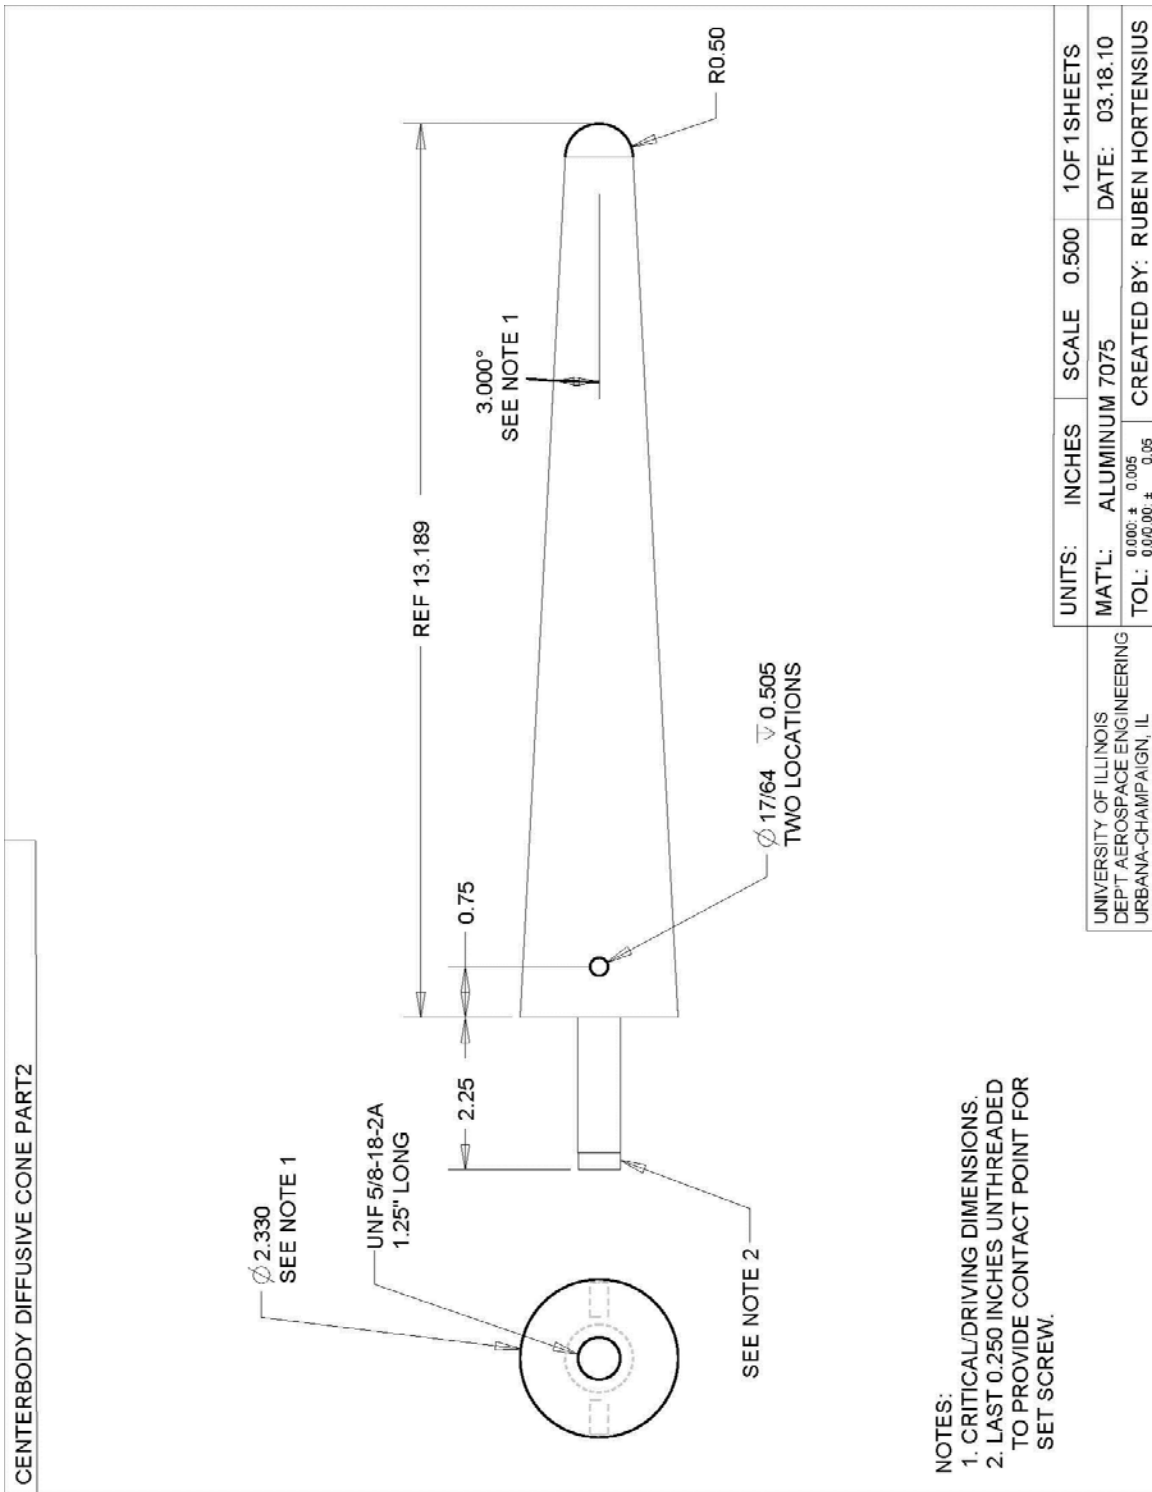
Centerbody Diffusive Cone Part B (aft segment) Engineering Drawing.
